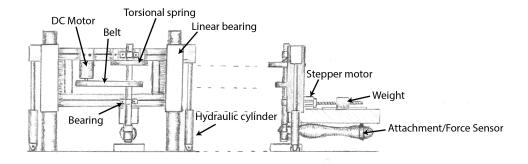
Concept 1 drawing with front view, left, and side view, right.
